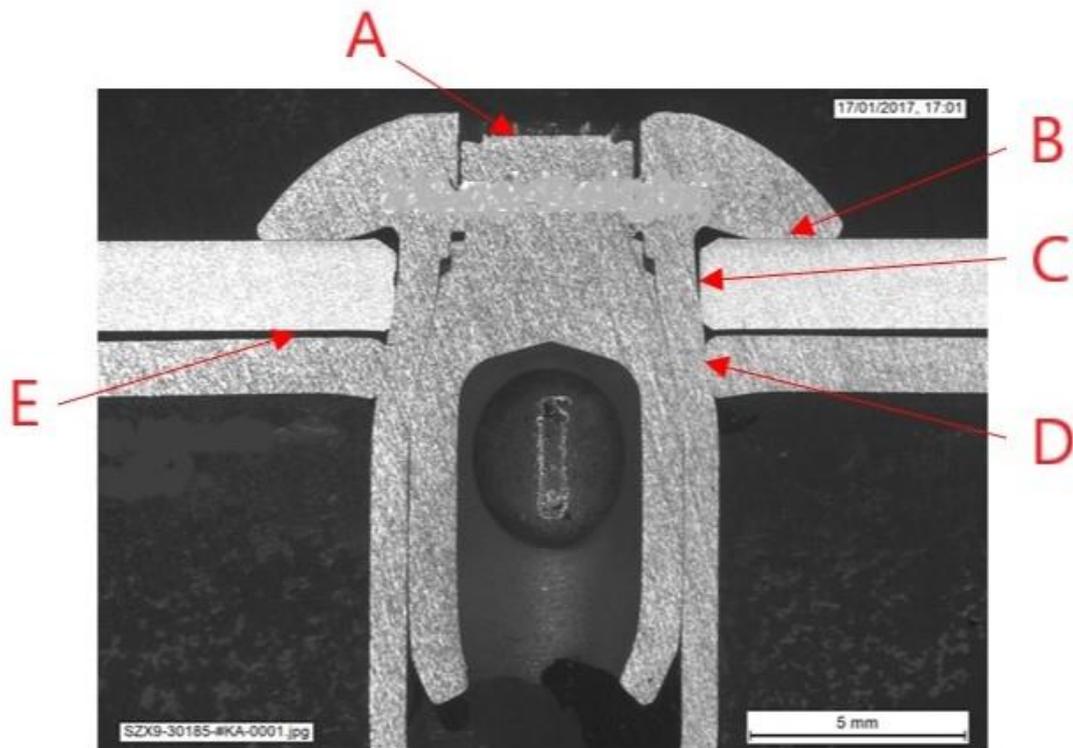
Cross section of a blind rivet showing the required quality factors. A. Mandrel fracture in rivet head required, B. Rivet head flush to sheet, C. Gap between rivet head and upper sheet preferably closed, D. Flush fit of rivet tail to lower sheet, E. Gaps between sheets should be closed. Source: TWI
